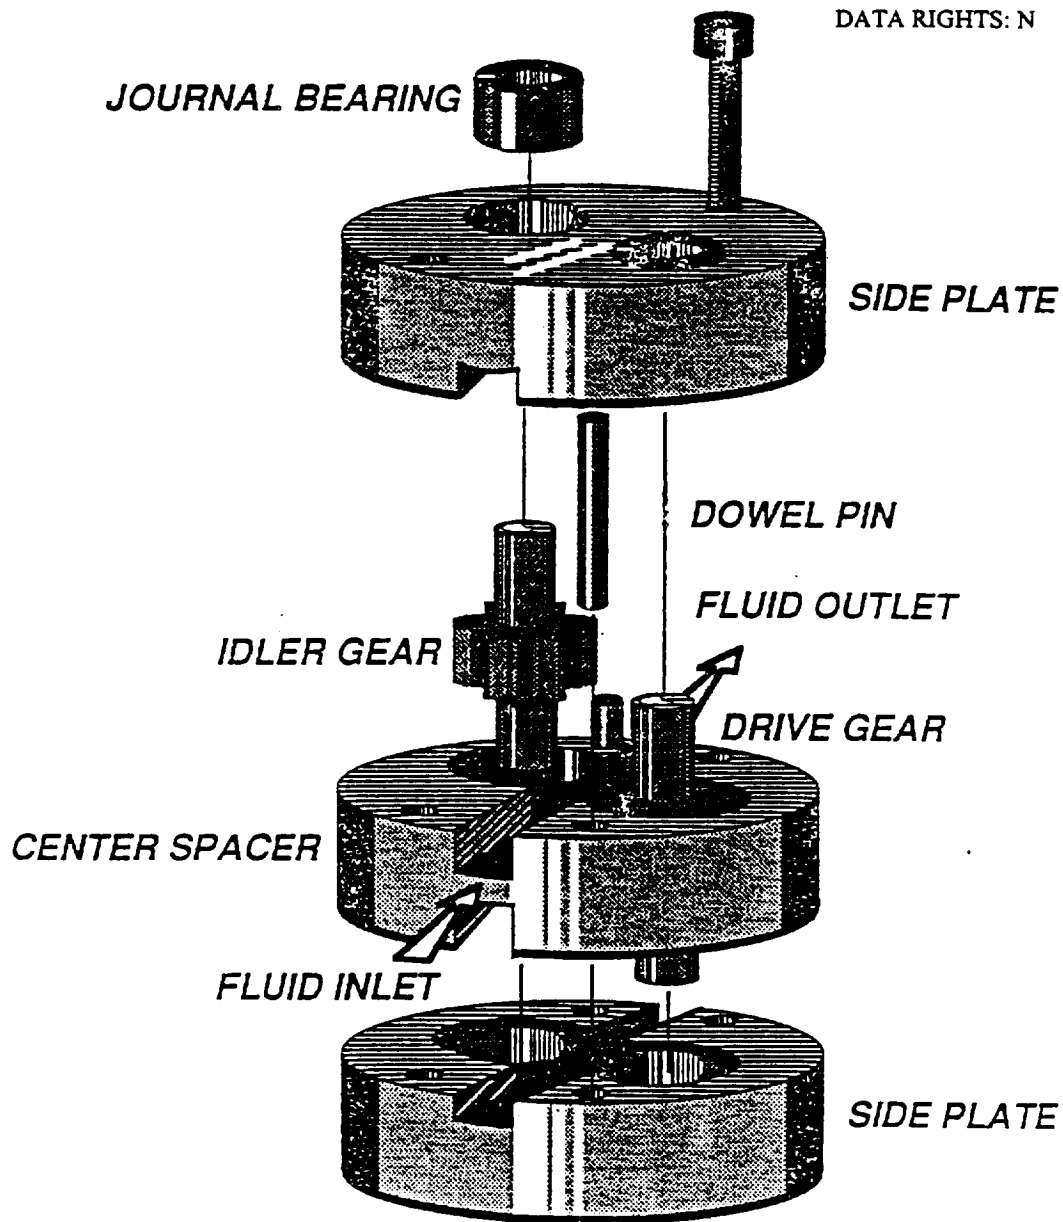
, Cross Section, HFS's Gear Cartridge Assembly
